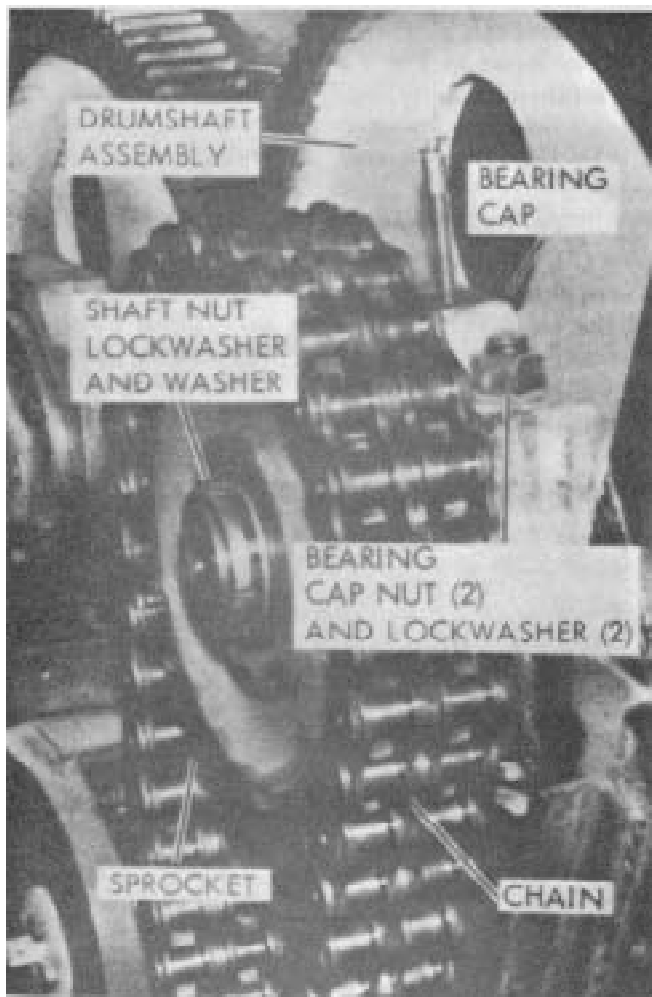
Rear drumshaft assembly, removal and installation (sheet 1 of 2).
